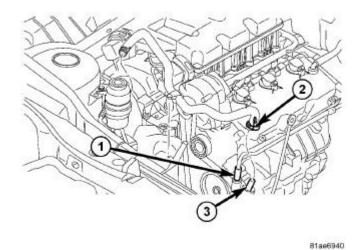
3.5L POWER STEERING LINES Courtesy of CHRYSLER LLC
